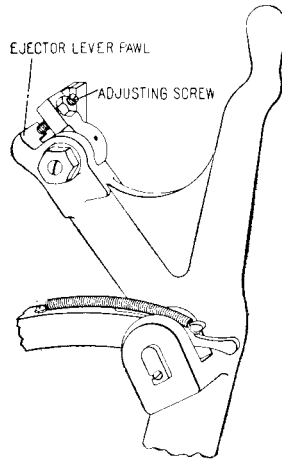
Diagram of the ejector lever and the ejector-lever pawl and screw for adjusting same so that when the cam comes around it will engage with the pawl, driving the ejector lever forward and ejecting the slug.
